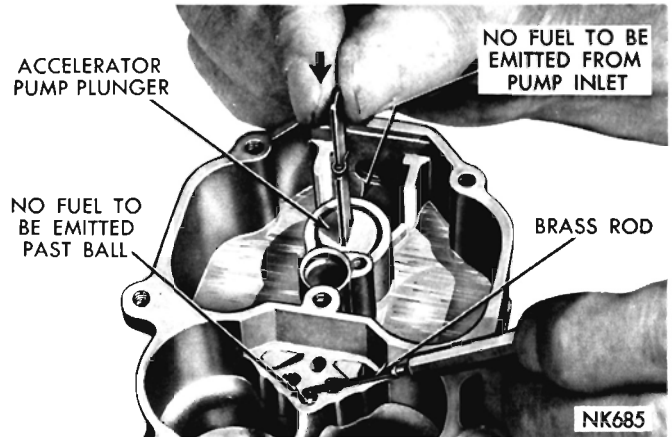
Testing Accelerator Pump Intake and Discharge Check Balls
